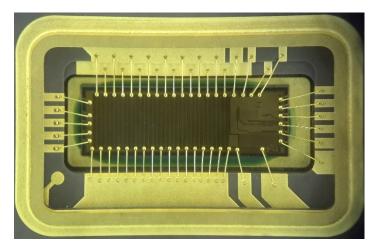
Assembled SPPL14080RH die in ceramic flatpack package
